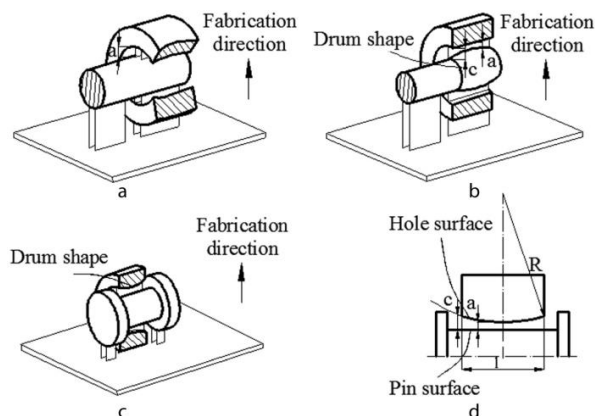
(a) Conventional pin joint; (b) drum-shaped pin joint; (c) drum-shaped hole joint; (d) schematic of the geometric relationship [7]
